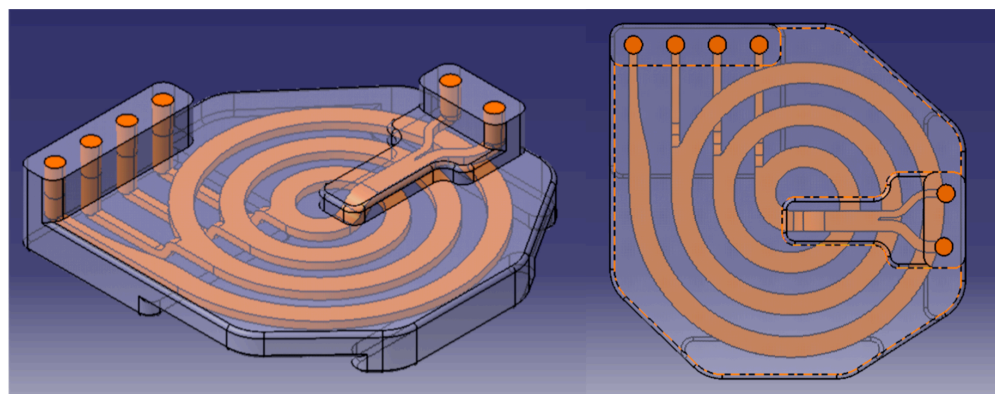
Three-dimensional model and top view of the printed millifluidic chip. The sorting device features two inlets, one for the buffer and one for the samples to be sorted. During the passage, the particles are deflected into four different outlets.
